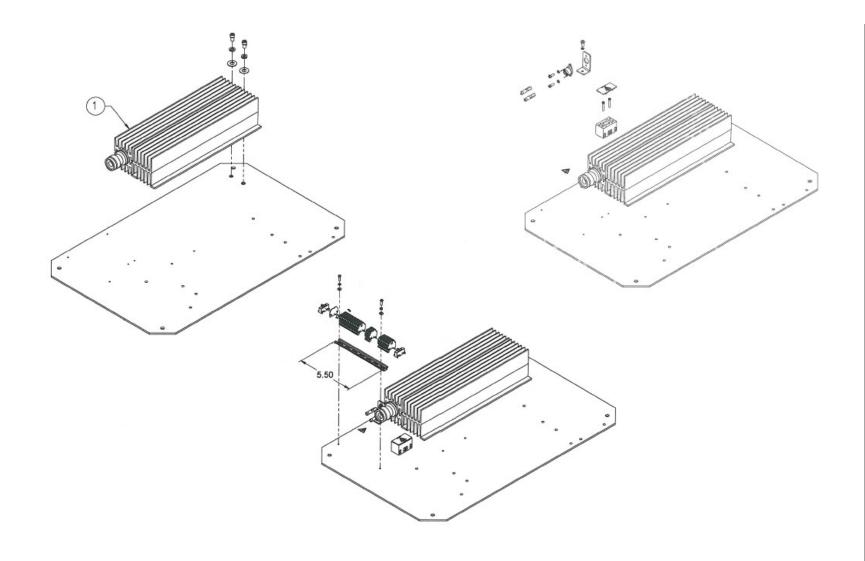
0.8 m sample cell panel assembly parts (Continued)
